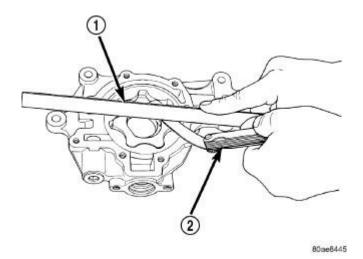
MEASURING CLEARANCE OVER ROTORS Courtesy of CHRYSLER LLC
